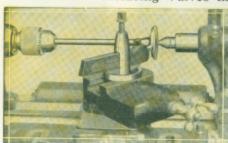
The lathe is the ideal tool for doing valve work—it will reface valves four times faster by turning than by grinding. Valves with a center hole in the head are held in a chuck by the stem and the head on the tail center.
